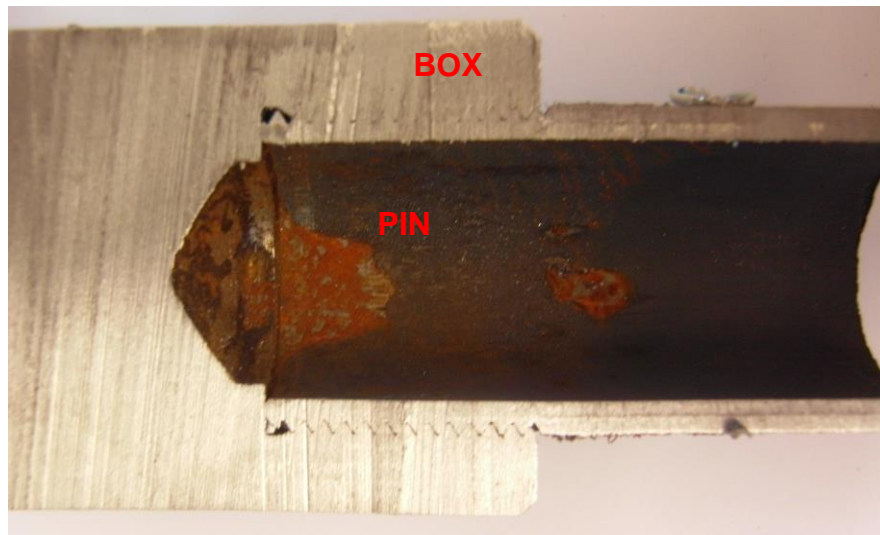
Cross-section of 1-inch pipe (Pin and Box).
